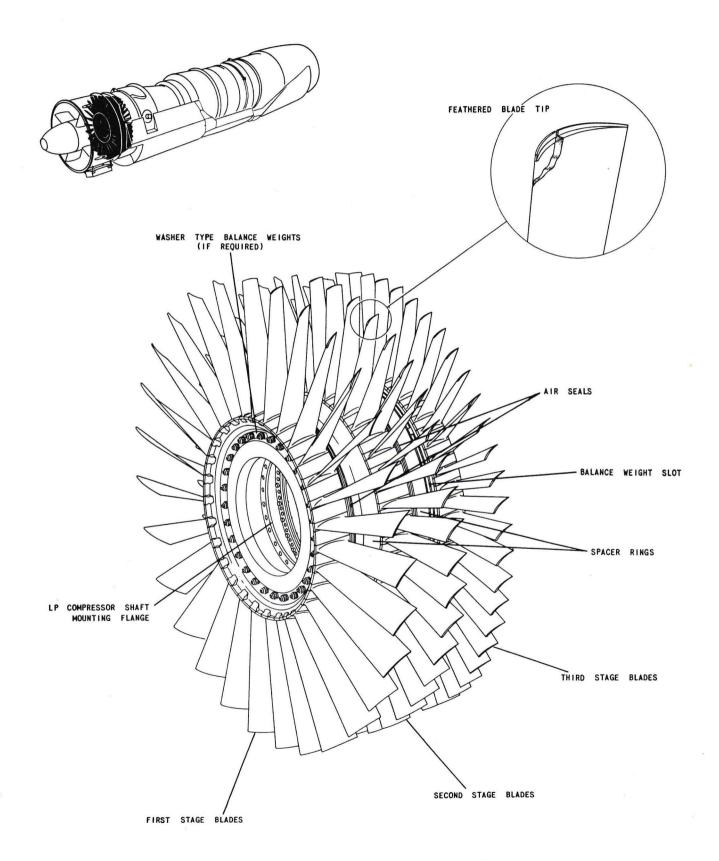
Low Pressure Compressor Rotor Assembly
